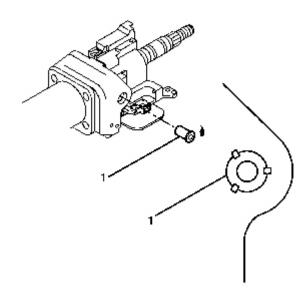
Seating Pivot Pins Into The Steering Column Tilt Head Assembly (Column Shift Lean Shaft)
